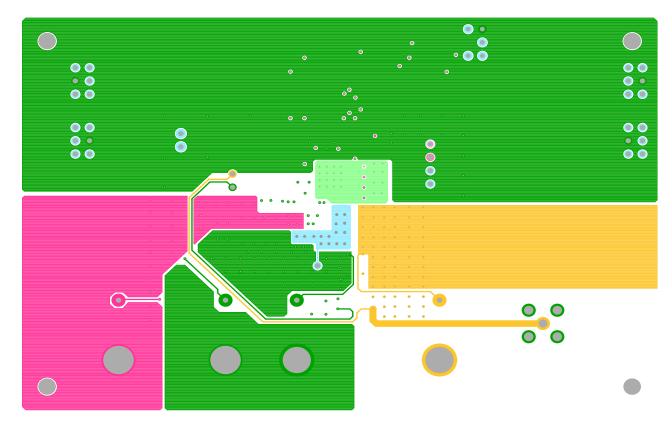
PCB - INNER LAYER - LAYER 3 (TOP VIEW)
